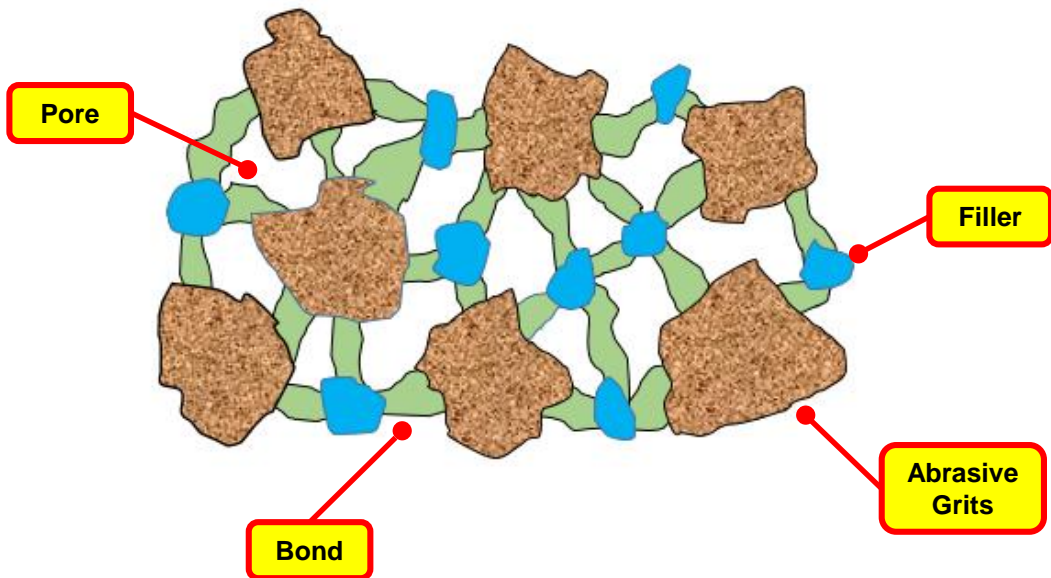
This illustration shows grinding wheel structure, abrasive grits, bond, porosity, and filler components.
